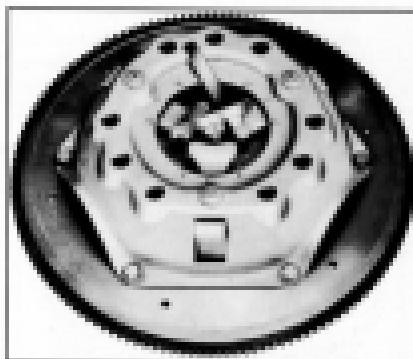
Setting Levers with Gauge Plate Tool J-1848
